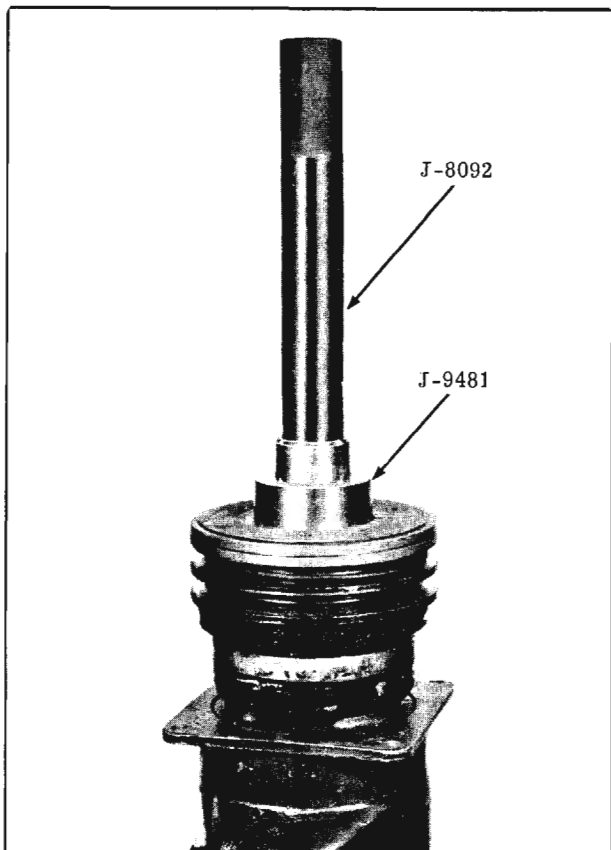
Installing Pulley and Drive Plate on Compressor
